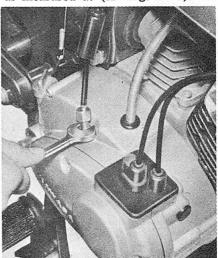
Clutch cable is adjusted as shown. Make certain lock nut is tightened after adjustment is complete.
